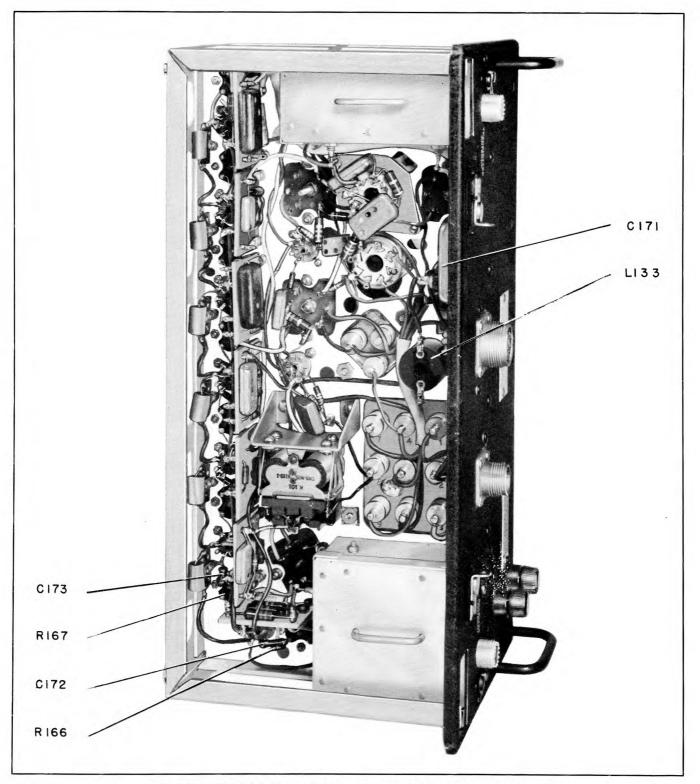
A. Radio Receiver and Transmitter BC-788-C— Chassis Bottom View (Front Oblique) Modifications
